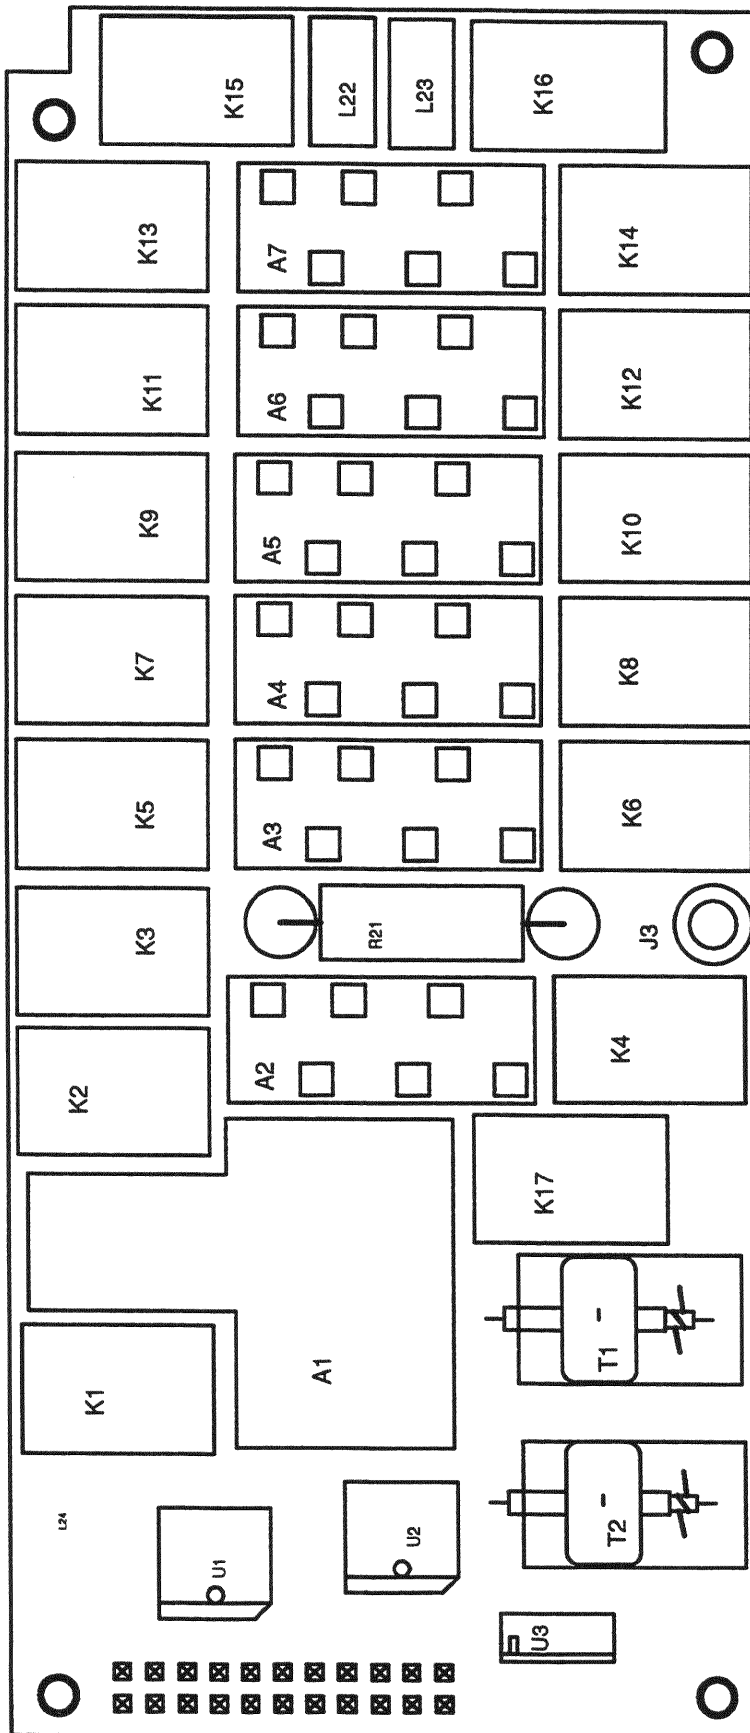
A8A2 Harmonic Filter PWB Assembly Component Location Diagram (10303-2140 Rev. C) (Sheet 1 of 2)
